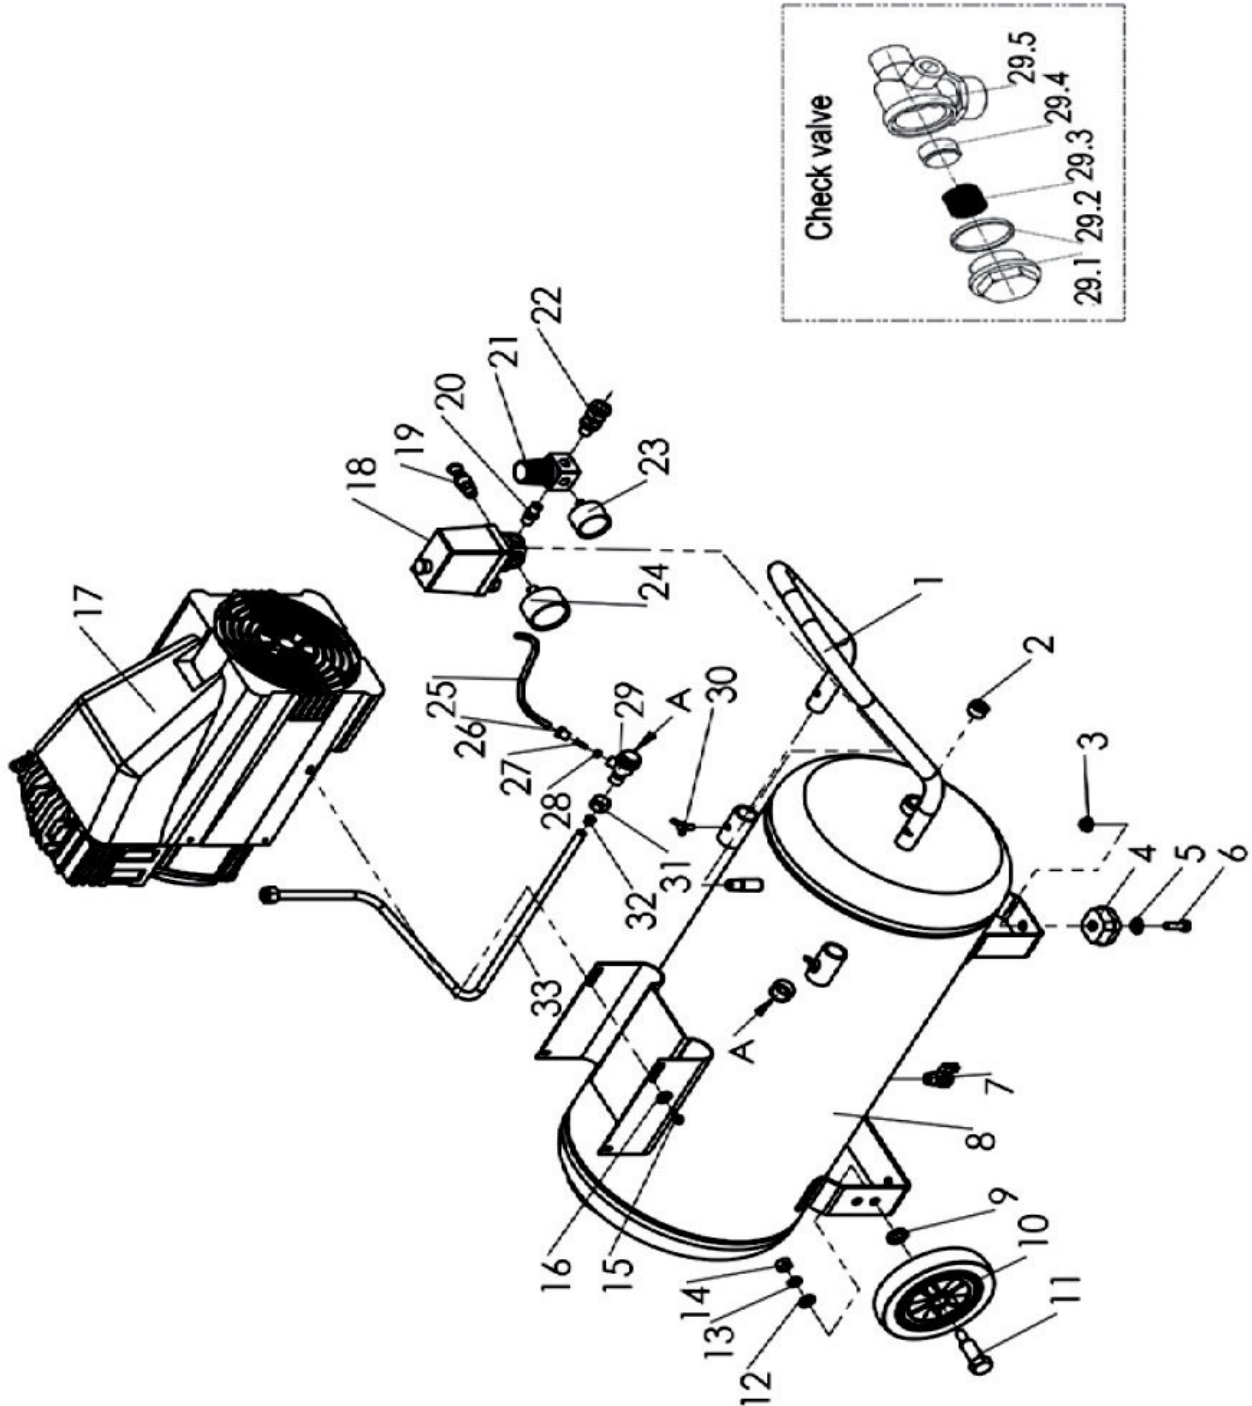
Spare parts drawing 1 MOBILBOY 301/50 AC
